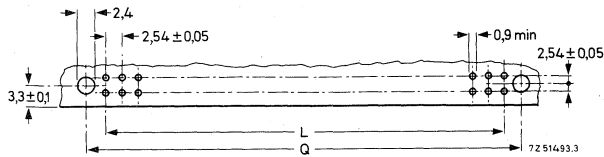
Hole pattern for board mounting of female parts; see Table 4 for dimensions L and Q.
